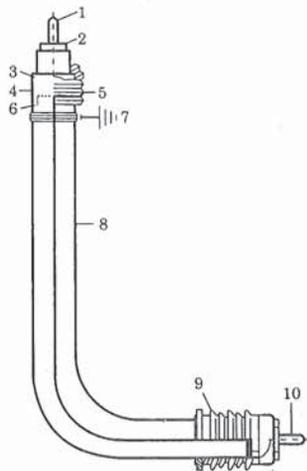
Construction of insulated busbar for indoor or outdoor application :
